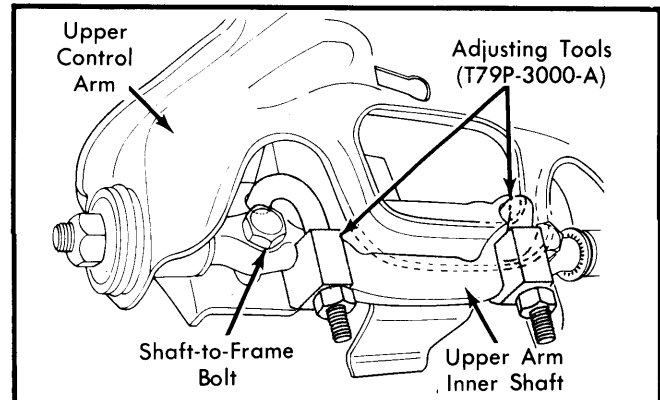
Caster and Camber Adjustment (Ford, Lincoln Town Car, Mark VI and Mercury)
